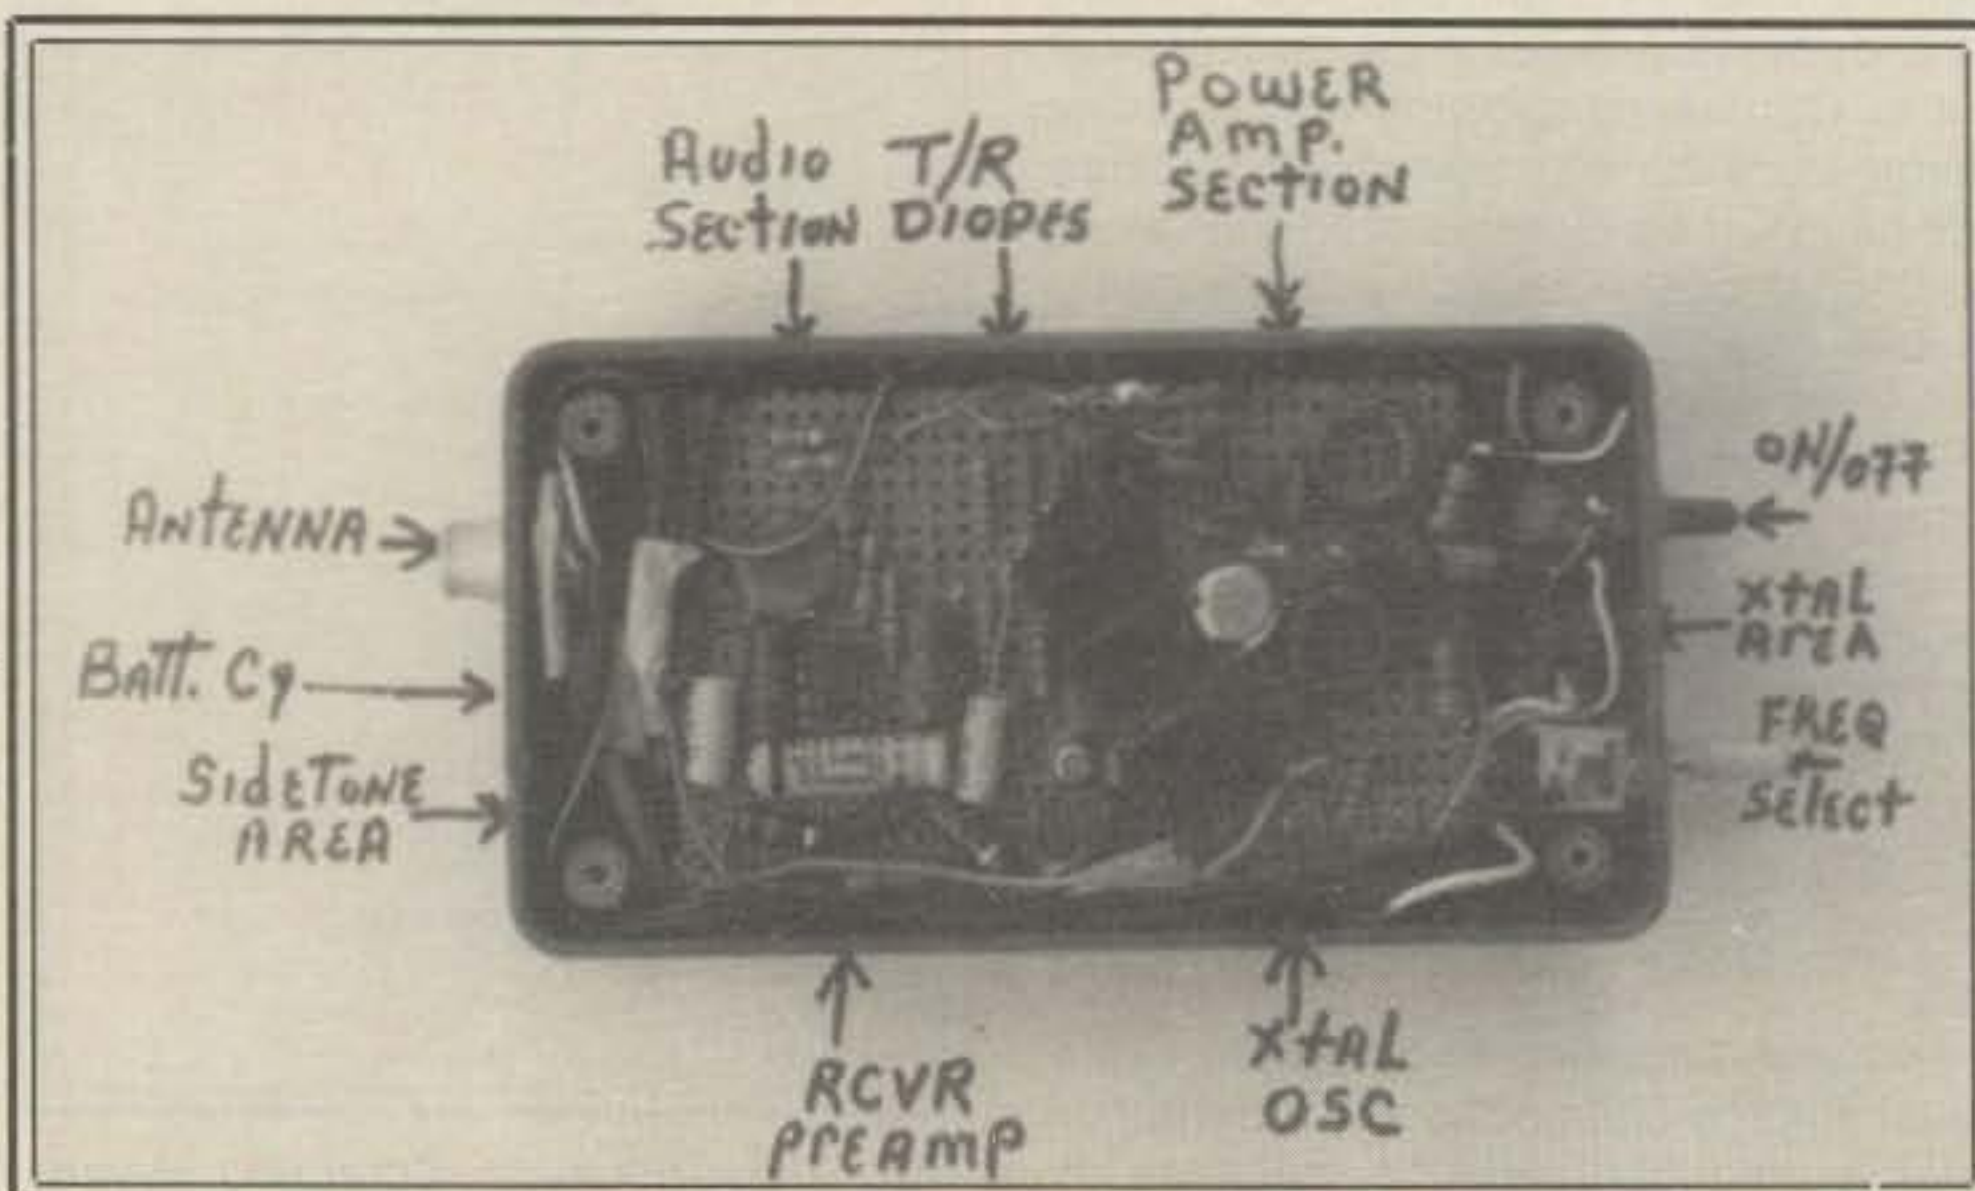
Inside view of the Mini 30 after assembly. The perfboard was trimmed to fit box using diagonal cutters.
